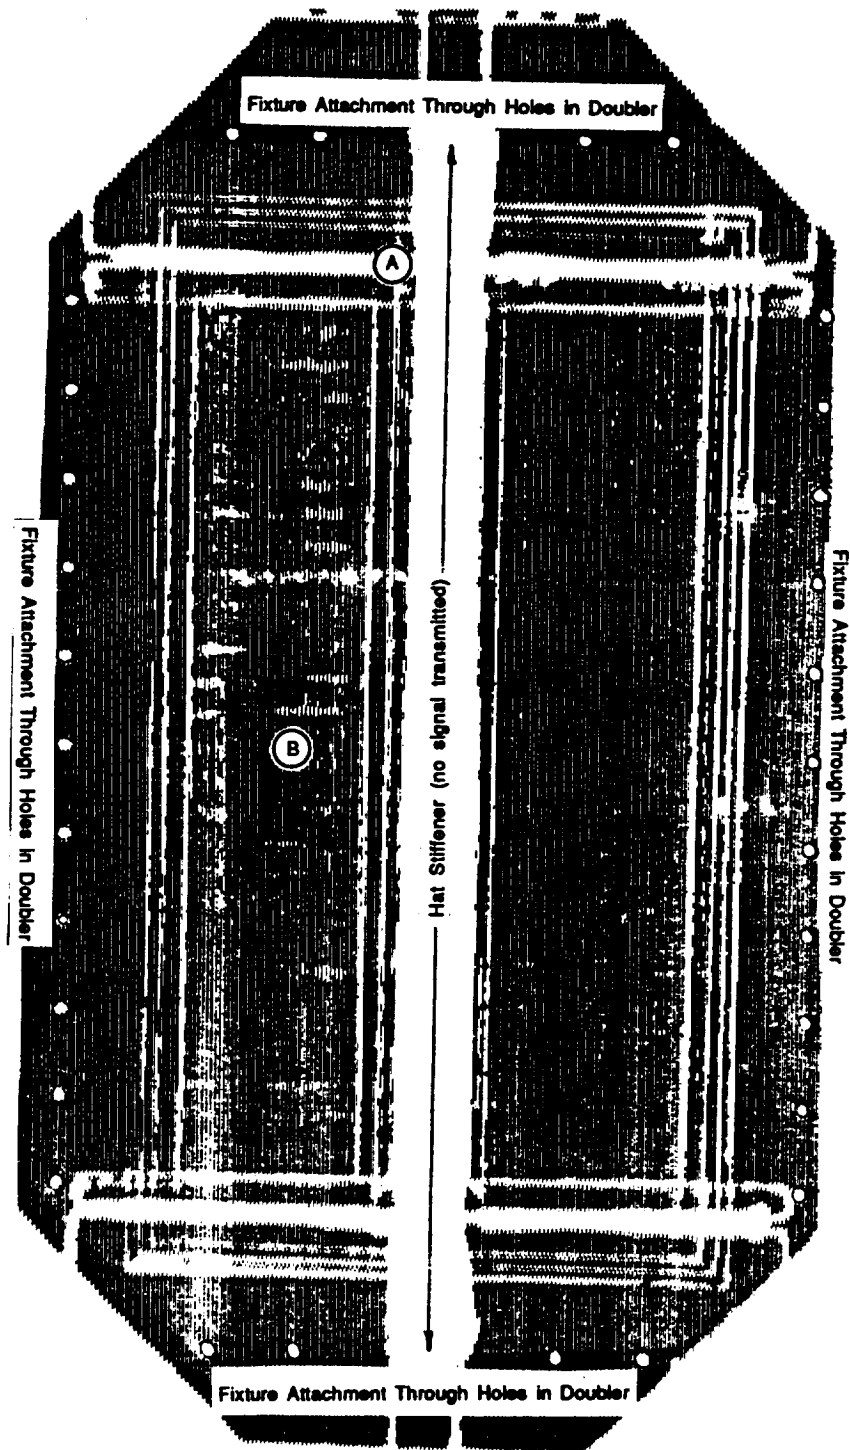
IMPACT SITES ON FRAME-STIFFENER INTERSECTION SPECIMEN NO. 3
